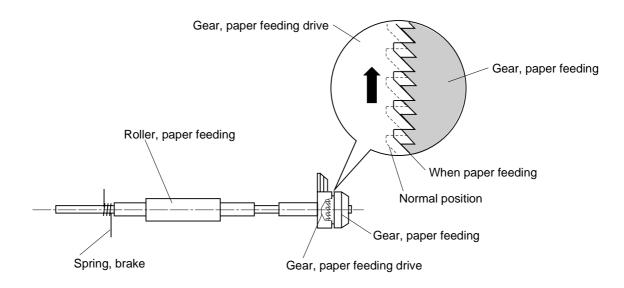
Operation of Gear, paper feeding drive and Gear, paper feeding while Paper Feeding and Returning
